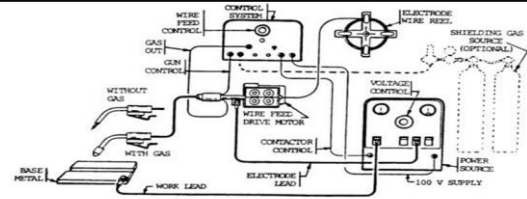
Equipment for flux-cored arc welding.
